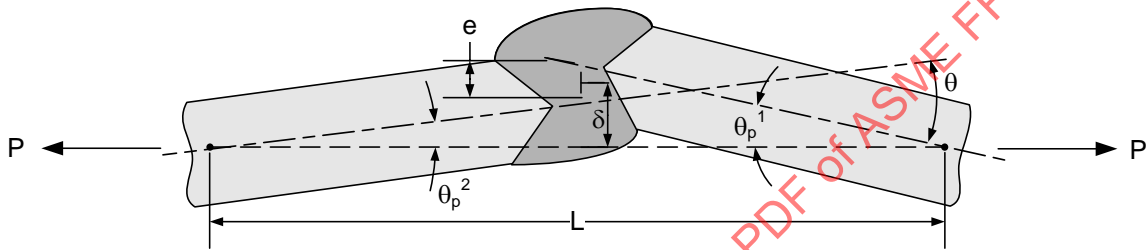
Centerline Offset Weld Misalignment in Cylindrical Shell Circumferential Weld Joints
